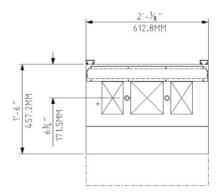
Outline Dimensions 2 Cylinder Euro Rack
